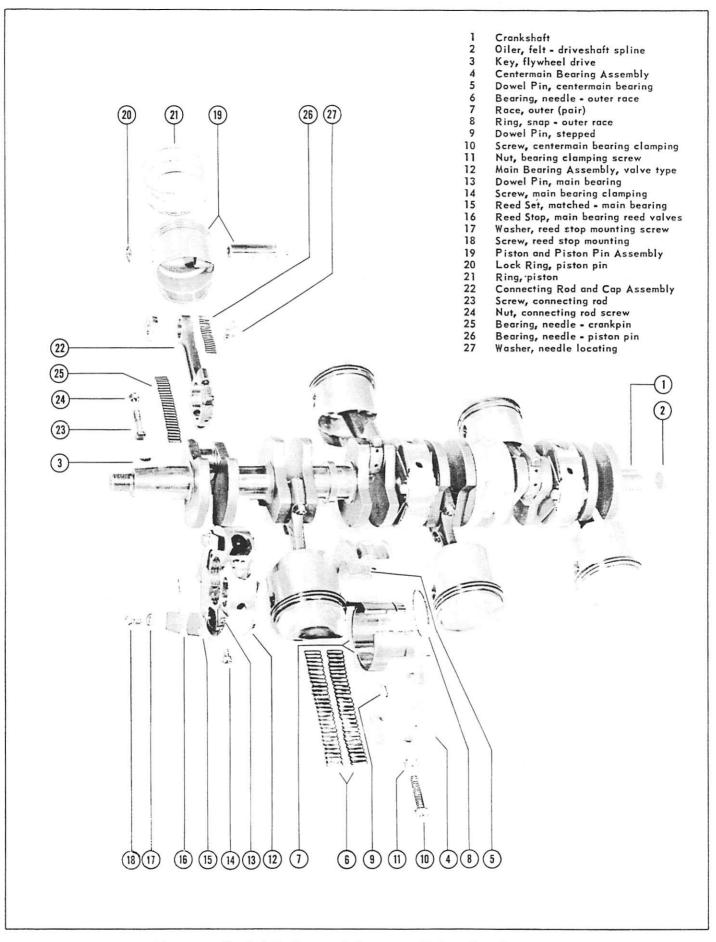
Crankshaft, Pistons & Connecting Rods, 6-Cylinder Models
